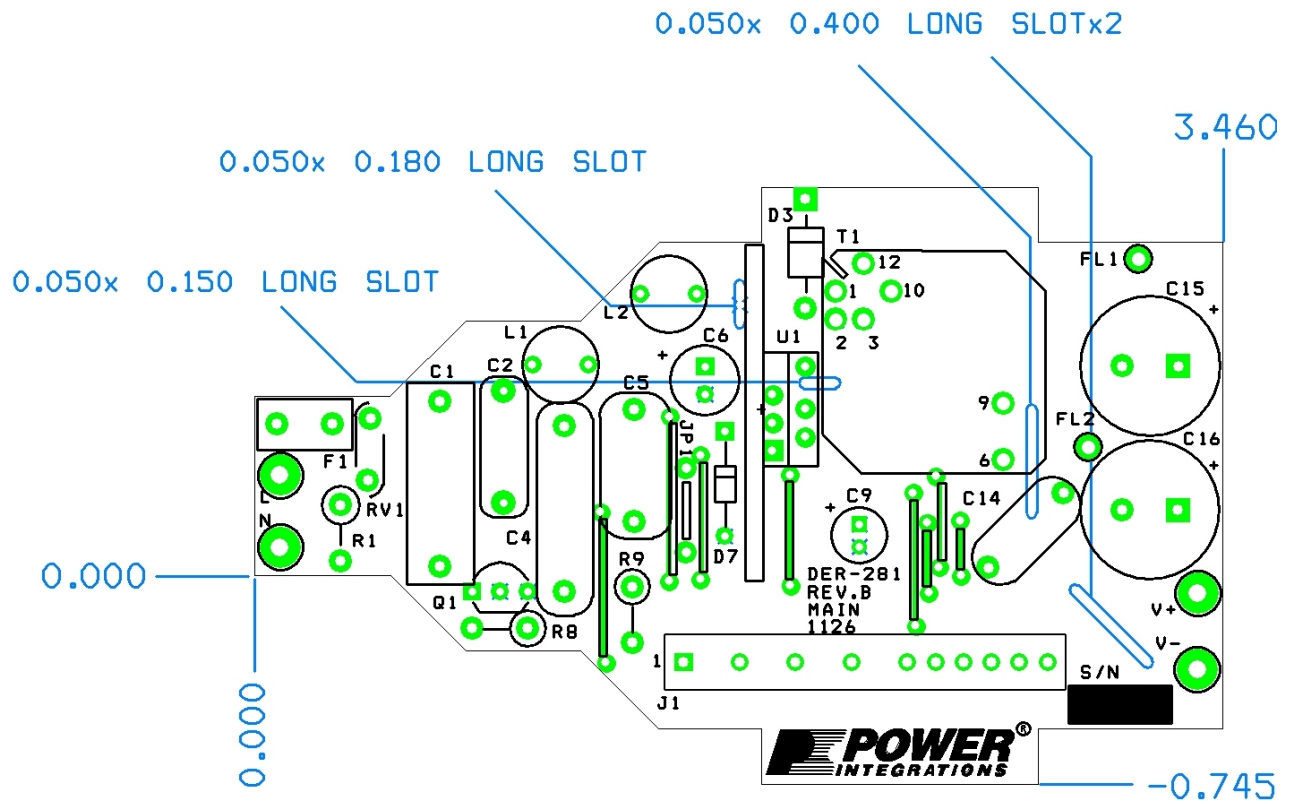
Printed Circuit Layout, Top Side (Main Board).
